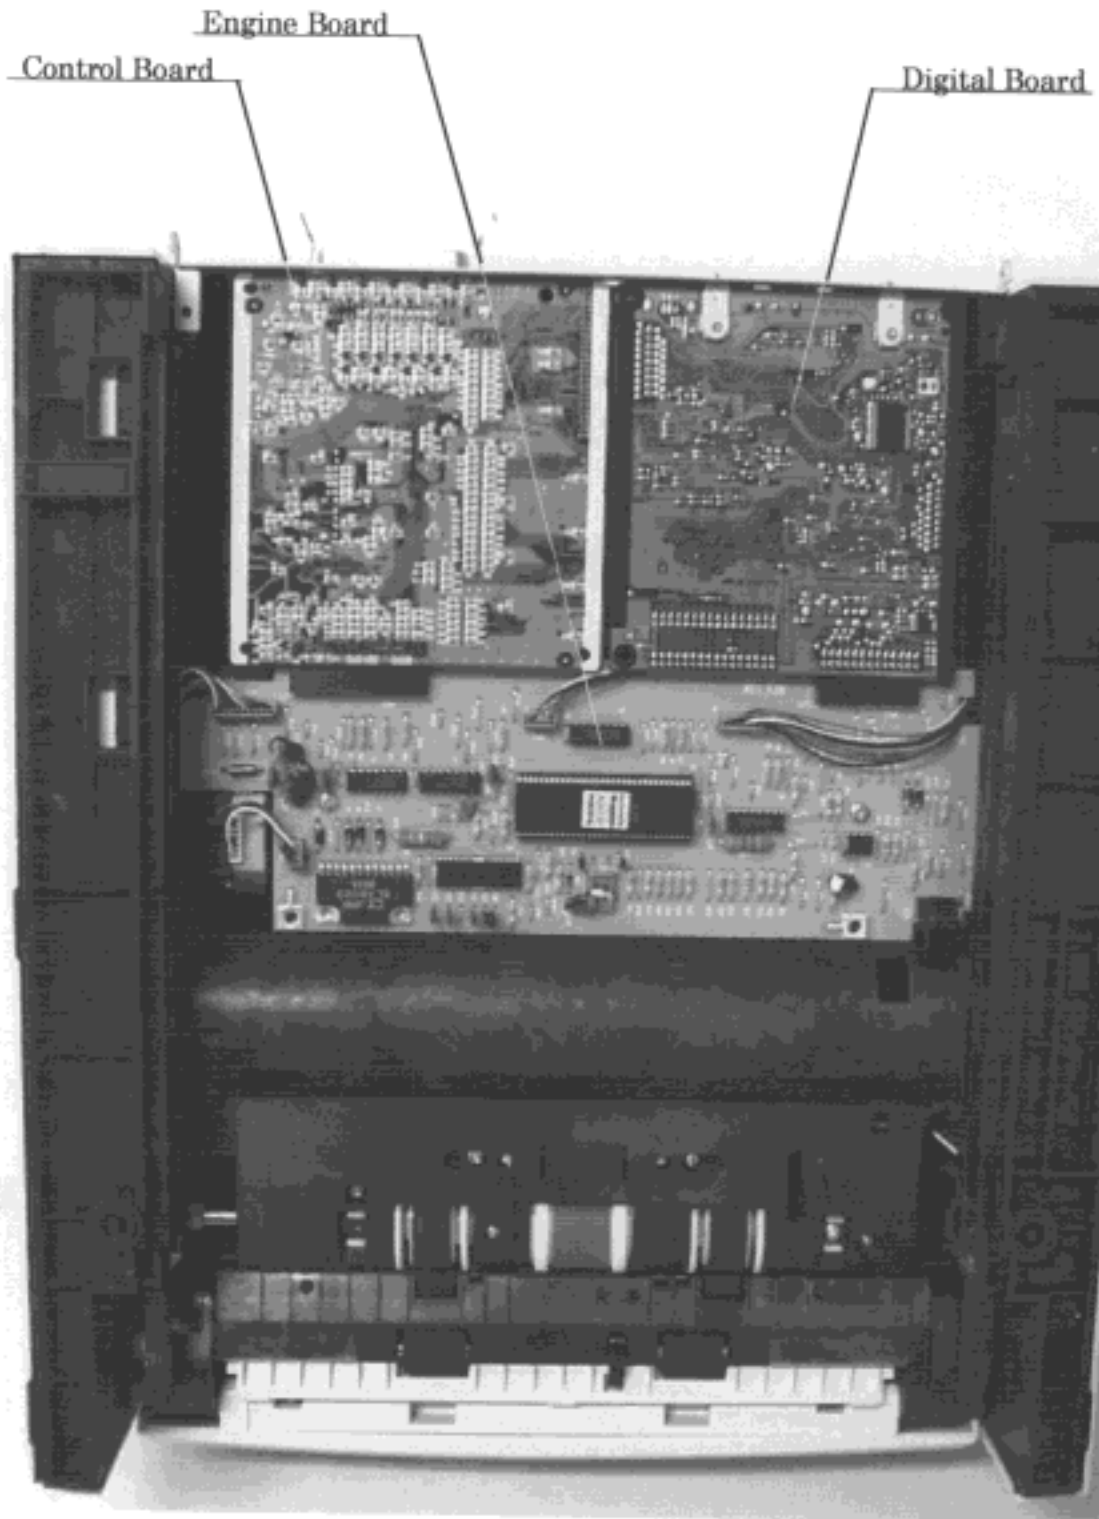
ENGINE BOARD COMPONENTS SIDE
